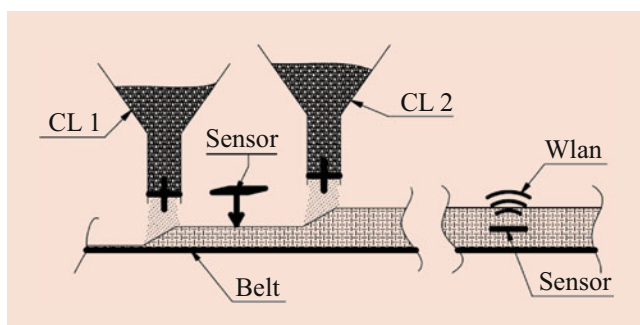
Insertion of the sensors between the two CL forming machines
